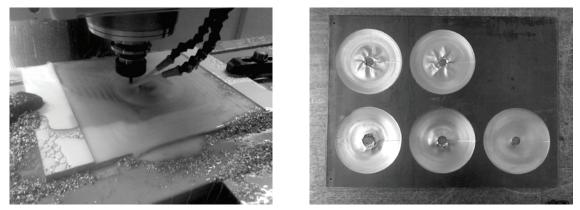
Milling of a two dimensional acoustic black hole and manufacturing defects
